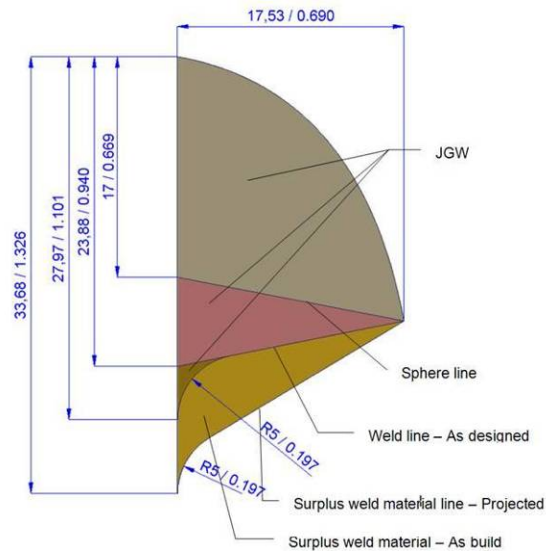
Minimal J-Groove weld height, as per As-built documentation
